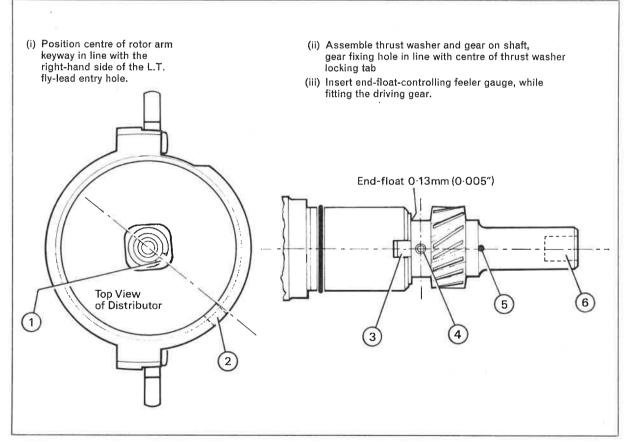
Fitting a non-standard driving gear (with extended shaft)
